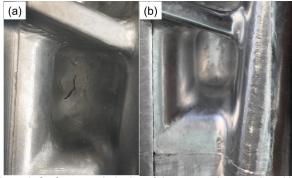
Surface morphologies of the test castings produced by using (a) machined insert with straight cooling channel, and (2) SLMed insert with conformal cooling channel.
